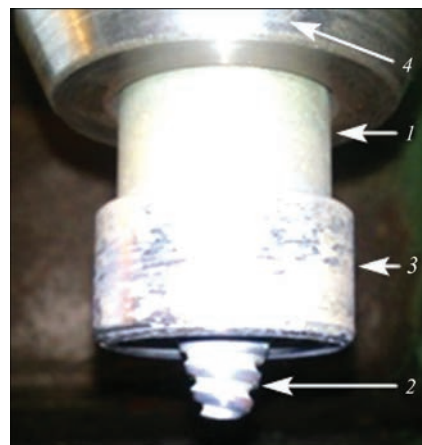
Welding tool for FSW (for designations see the text)
